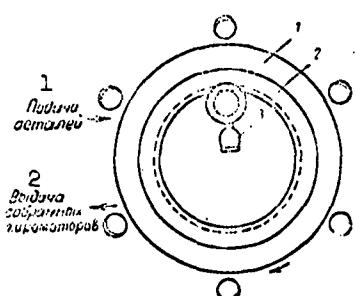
Layout of circular conveyor. 1) Intake of parts; 2) delivery of assembled motors.
